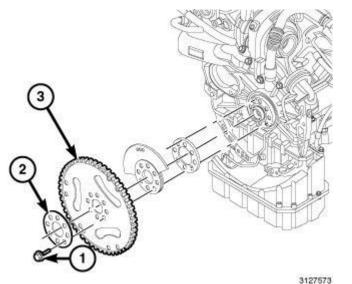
Flex Plate, Counter Weight, Tone Wheel & Bolts Courtesy of CHRYSLER GROUP, LLC
